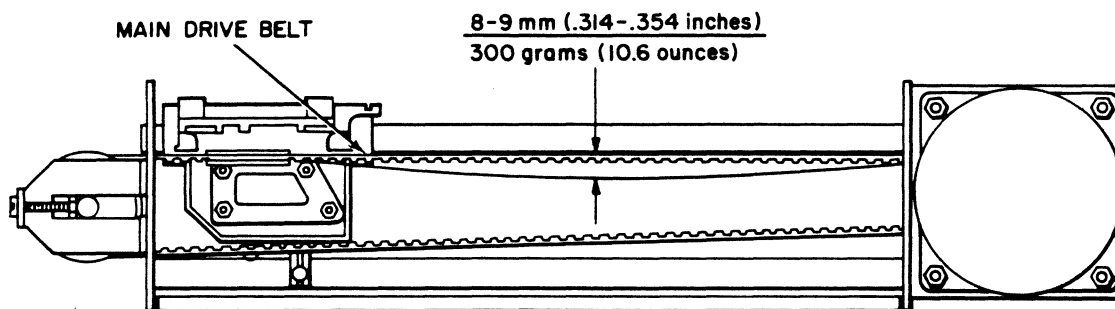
MAIN DRIVE BELT ADJUSTMENT
